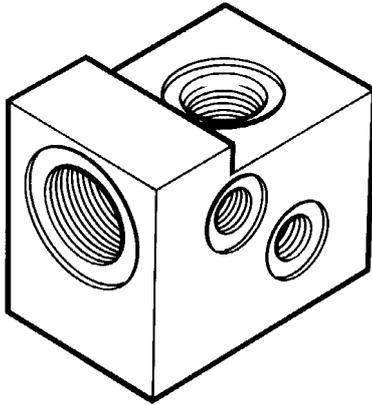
892/00881 Valve Spool Seal Fitting Tool
